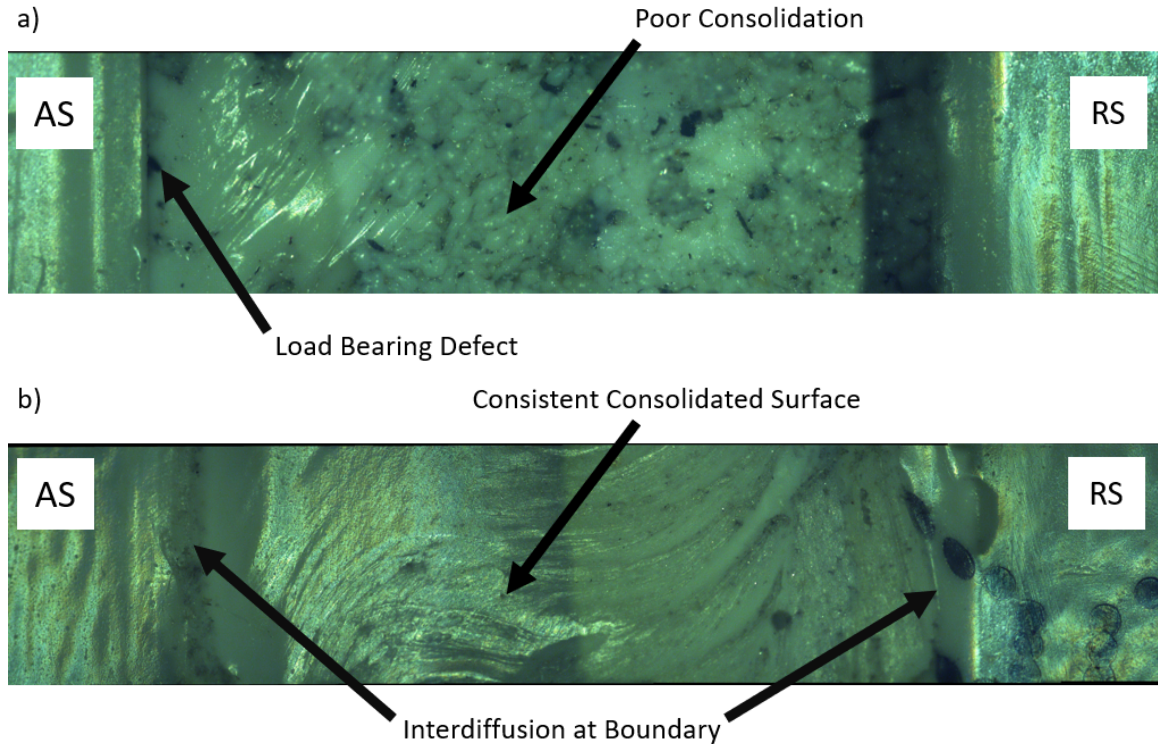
Comparison of C1-1 (a) and C3-1 (b) weld surfaces. a) reveals a defect that initiated weld failure. b) has a consistent weld morphology around the pipe circumference.
